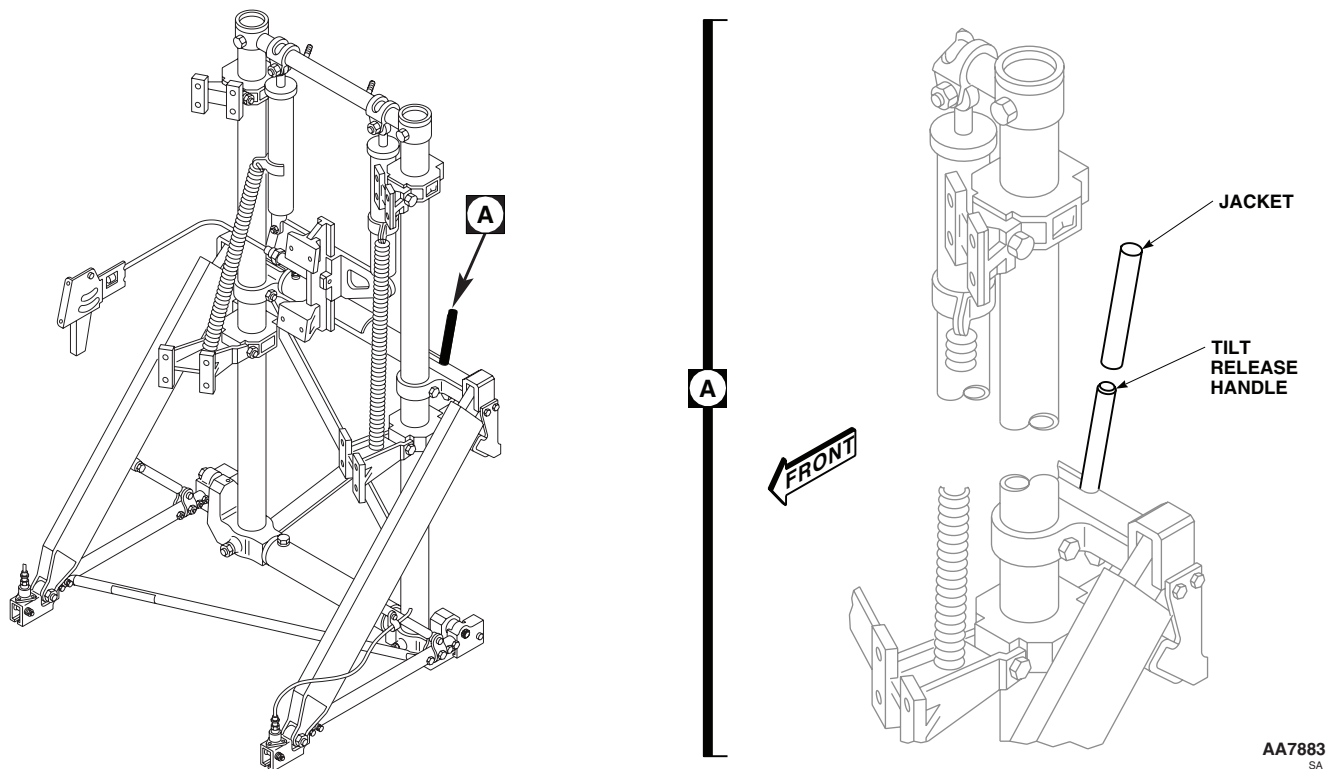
Replace Seat Frame Tilt Handle Jacket.
